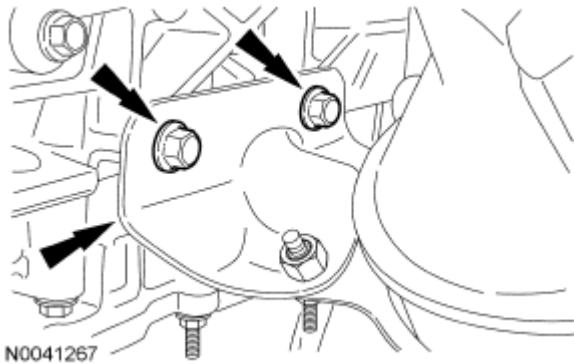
Locating Catalytic Converter Bracket Assembly Bolts
